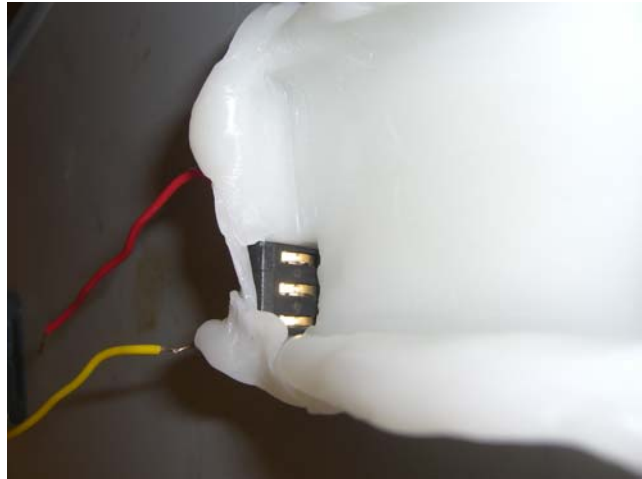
Photo of three-prong brass connector and battery holder molded from ShapeLock®.
